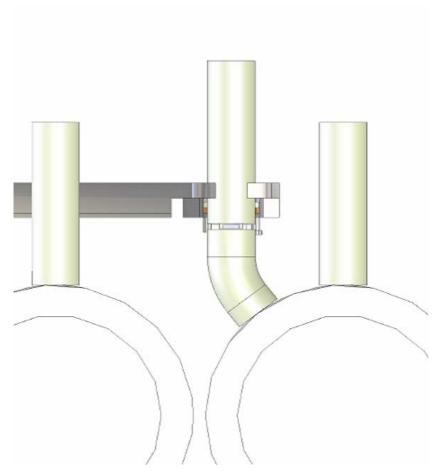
Tube Severance is Accomplished Using a Tube Severance Cutting Machine. This frees the elbow for removal.
